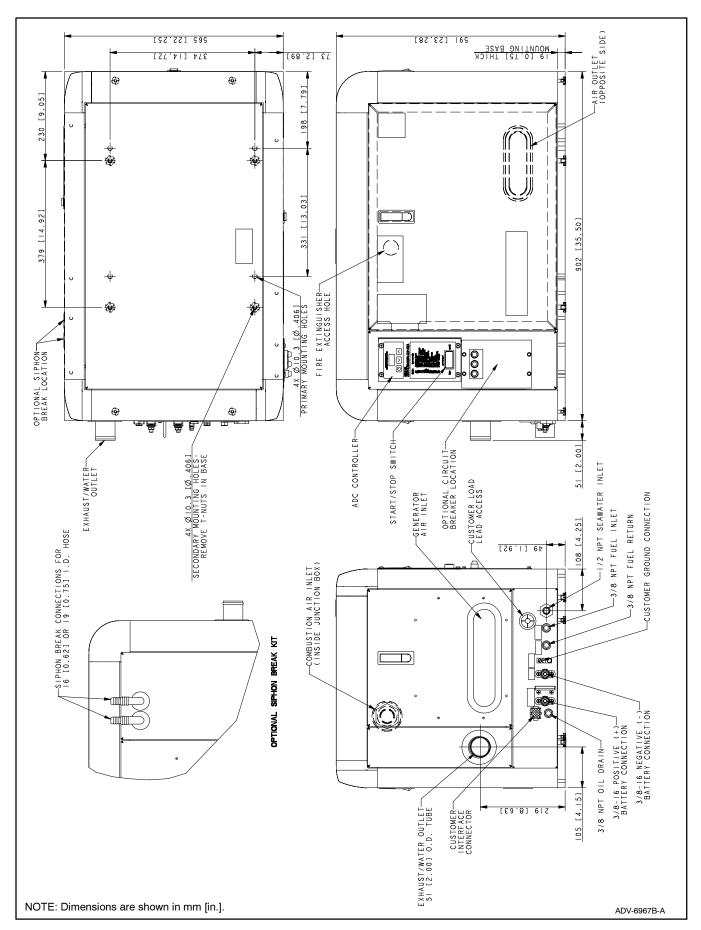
Dimension Drawing, 9EOZD and 7EFOZD with Sound Shield
